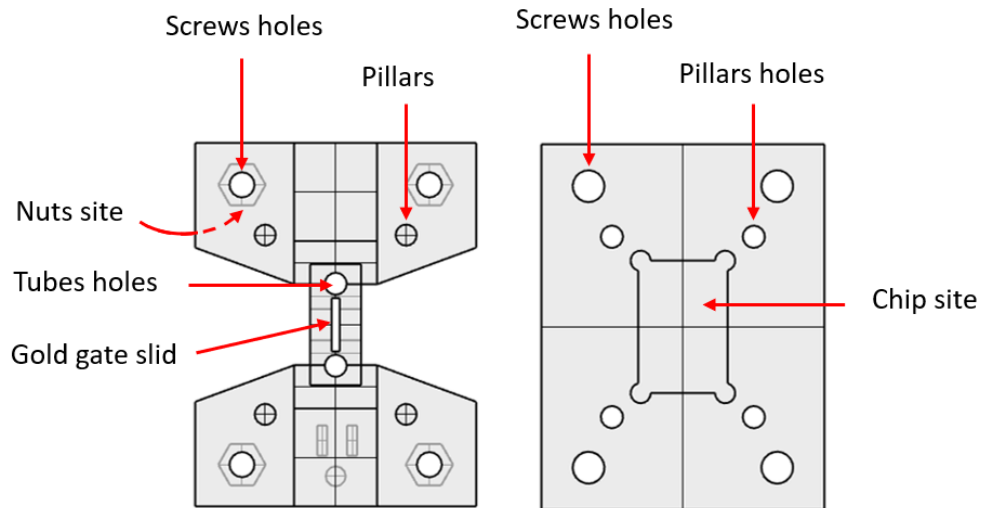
Top view of the top and bottom elements of the holder. Design by M. Segantini.
